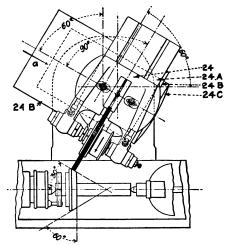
Grinding machine wheel head set for grinding tapered work.
